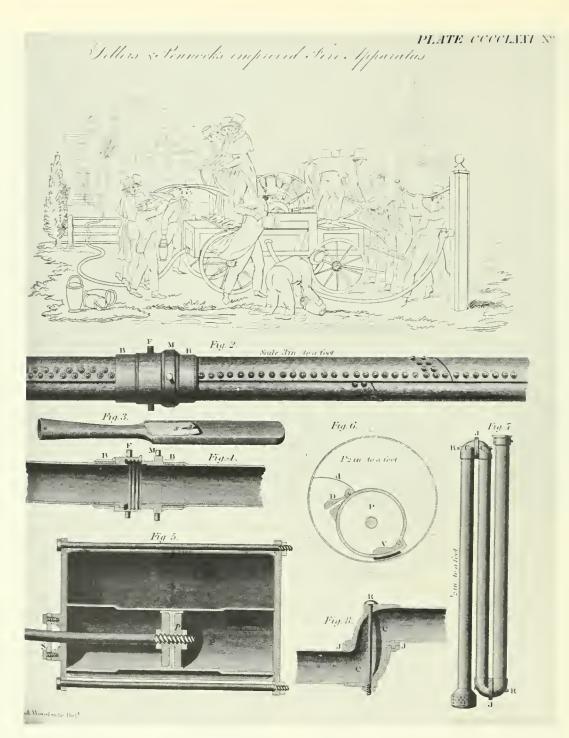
"Hydraulion" fire engine and hose, about 1825. This engine, combining pump and hose reel, was "particularly suited for villages." "Fig. 2," riveted leather hose; "Fig. 3," rivet holder and back-up anvil for riveting hose (the anvil is attached to a wooden pole for insertion in the hose); "Fig. 4," brass couplings; "Fig. 5." longitudinal section of the horizontal pumps (piston was
